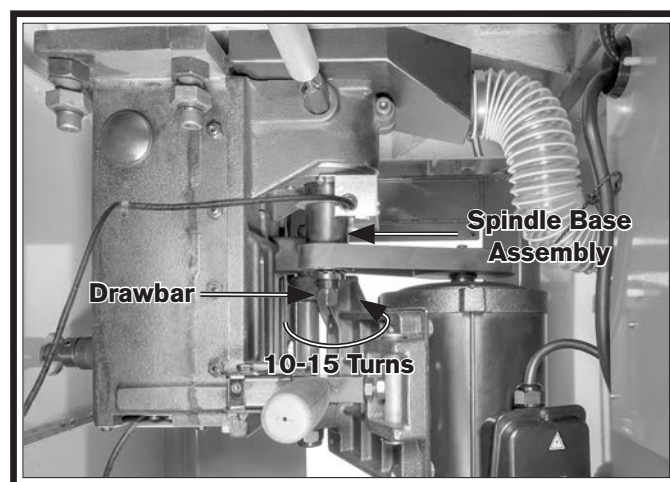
Drawbar inserted into bottom of spindle base assembly.
